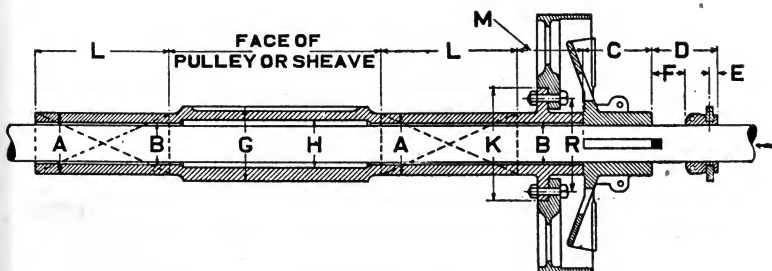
,252.—Quill drive. This is the proper transmission arrangement substitute for heavy service, requiring large pulleys, sheaves, gears, etc. It is a hollow shaft supported by independent bearings. The main driving shaft running through the quill is thus relieved of all transverse stresses. The power is transmitted to the quill by means of a friction or jaw clutch. When the clutch is thrown out, the pulley or sheave stands idle and the driving shaft revolves freely within the quill. As there is no contact between moving parts there is no wear. Jaw clutches should be used for drives demanding positive angular displacement. They can only be thrown in and out of engagement when at rest. All very large clutch pulleys, sheaves, or gears designed to run loose on the line shaft are preferably mounted on quills. The letters A, B, C, etc., indicate the dimensions to be specified in ordering a quill.
